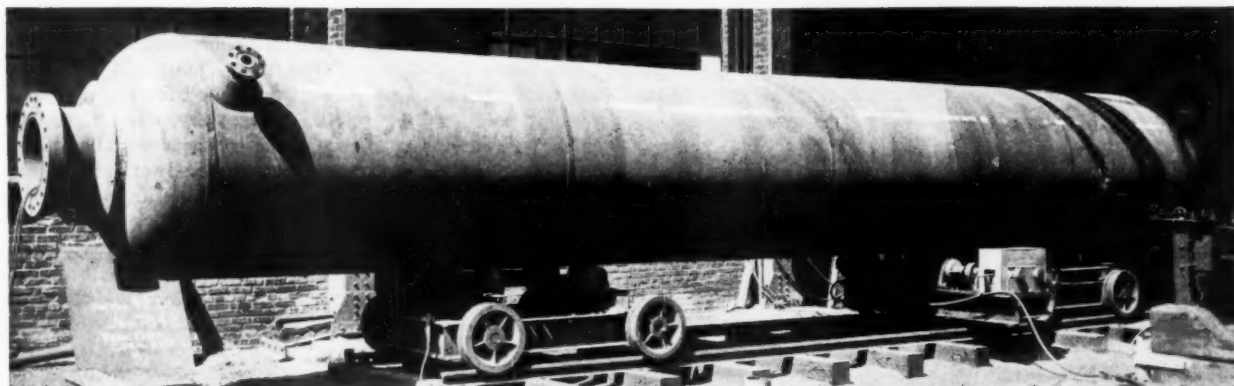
REACTION CHAMBER MADE OF SEAMLESS ROLLED RINGS JOINED BY ELECTRIC FUSION WELDING. WEIGHT, 75 TONS
